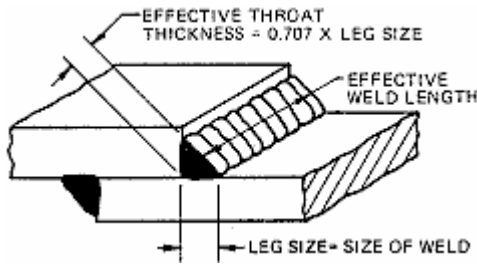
Fillet weld nomenclature.
